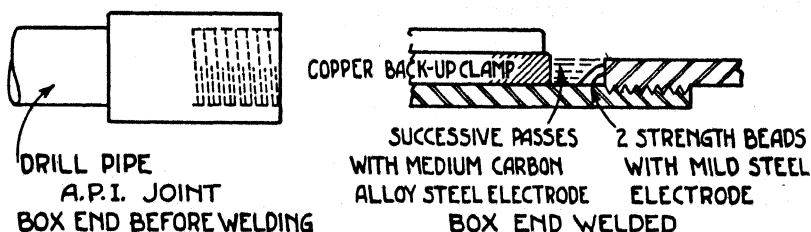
A.P.I. joint. Box end. Before and after welding.
